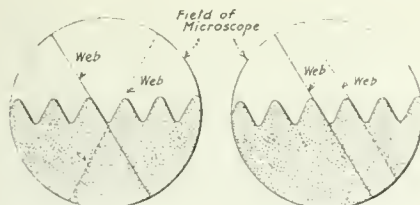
METHOD OF MEASURING THREAD ANGLE BY MICROSCOPE MICROMETER.
